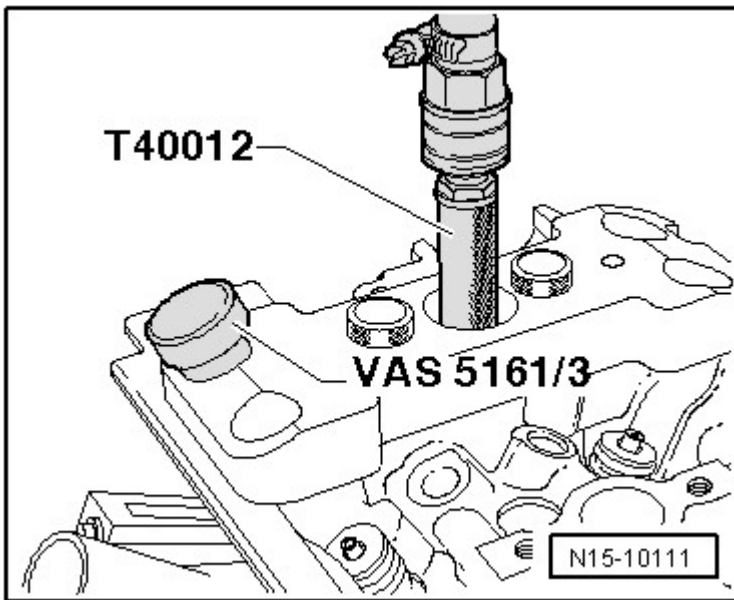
Identifying Drift VAS 5161/3 And Plastic Mallet To Loosen Stuck Valve Keepers
